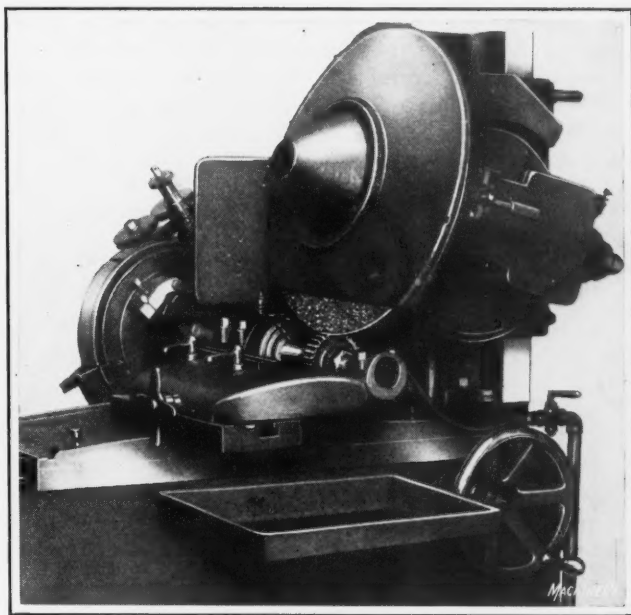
Gear-tooth Grinding Machine of the Generating Type
